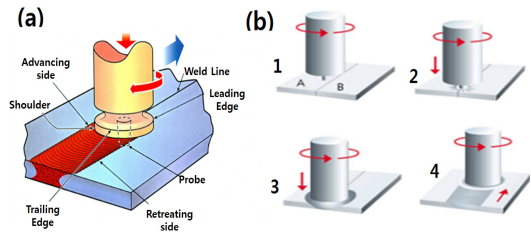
Schematic Diagram of Friction Stir Welding
